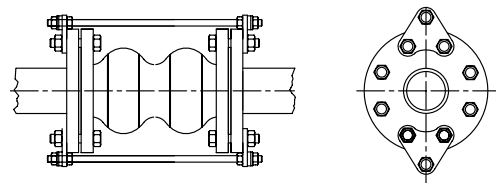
Typical piping layout showing the use of Control Rods with Expansion Joints, when proper system anchoring is limited.
